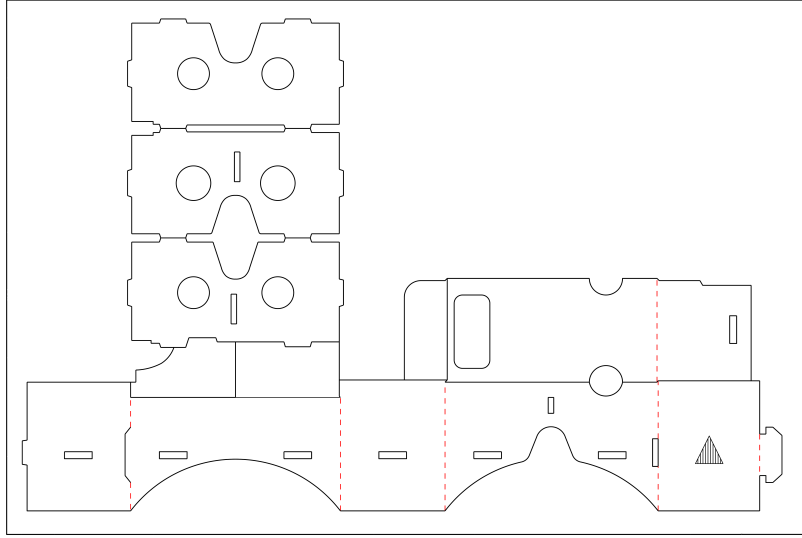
The initial VR-product design on a 600 x 400 mm cardboard sheet.
